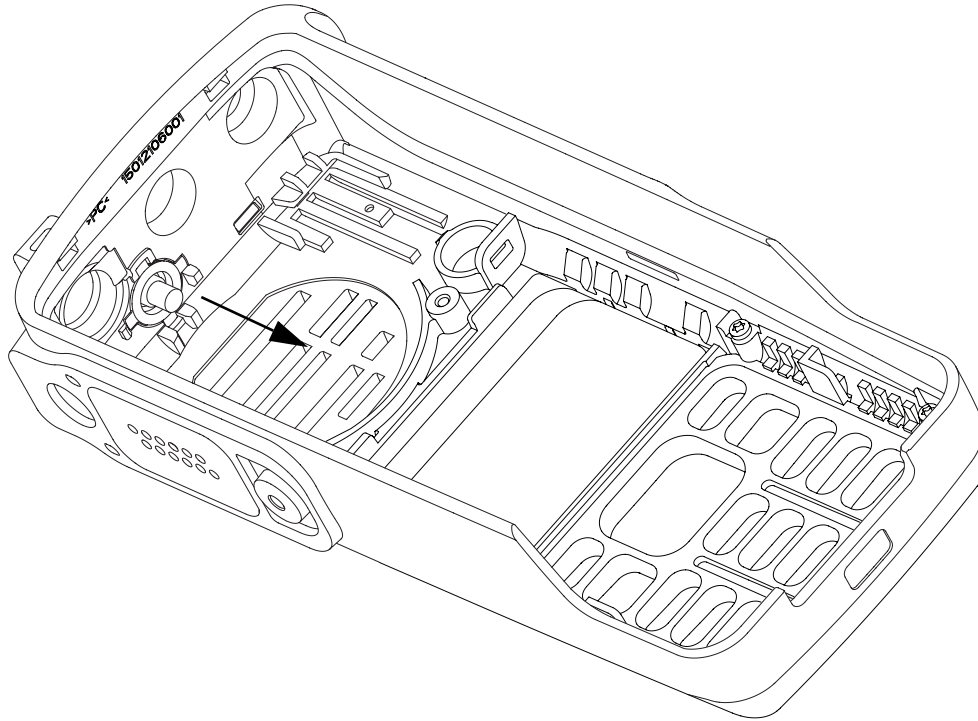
Emergency Button disassembly for Full Keypad Model
